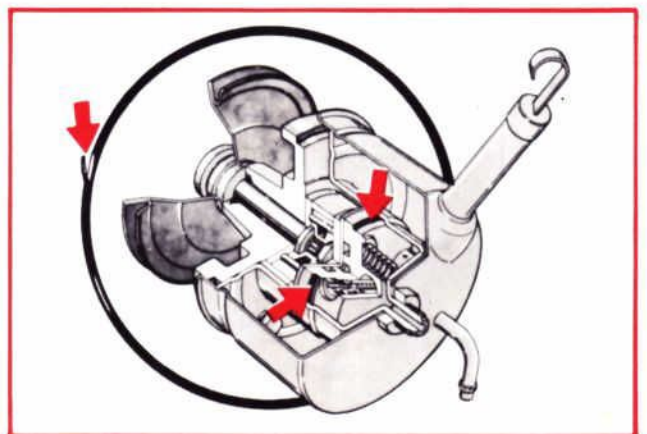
Low Pressure Leak at Housing-to-Valve and Cover Assembly
